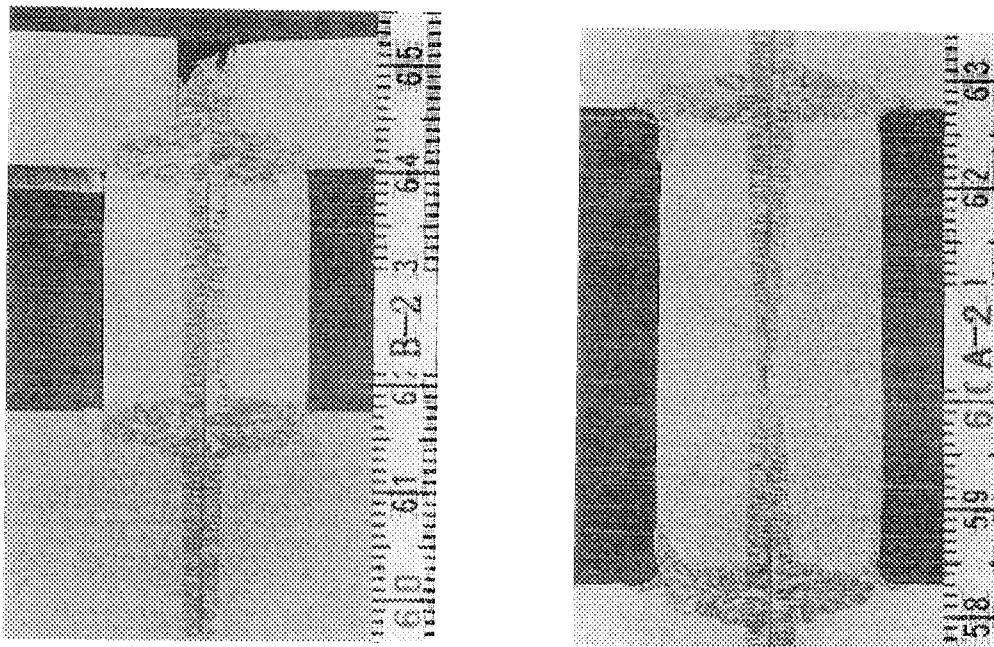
Cross section observation of the welded plugs (24 mm diameter left, 45 mm diameter right) over welded by EB welding
